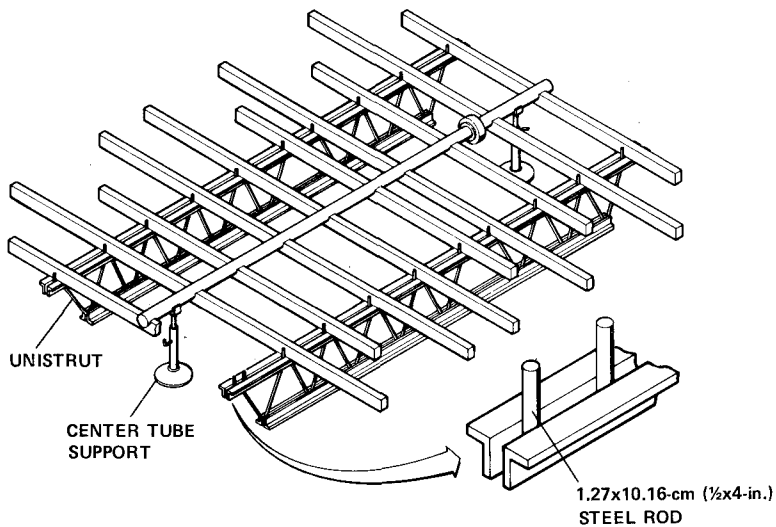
Mirror Rack Weld Assembly Fixture
